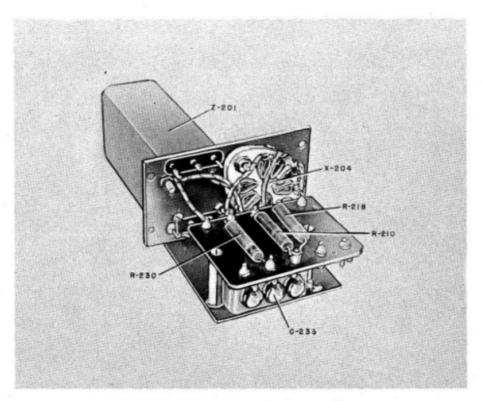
Receiver 1st I-F Assembly - Bottom View
